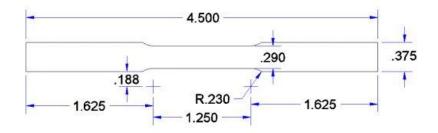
Specimen Configuration (All dimensions in Inches): Nominal Thickness: .080: Surfaces in As-Fabricated Condition, Edges Waterjet Cut.
